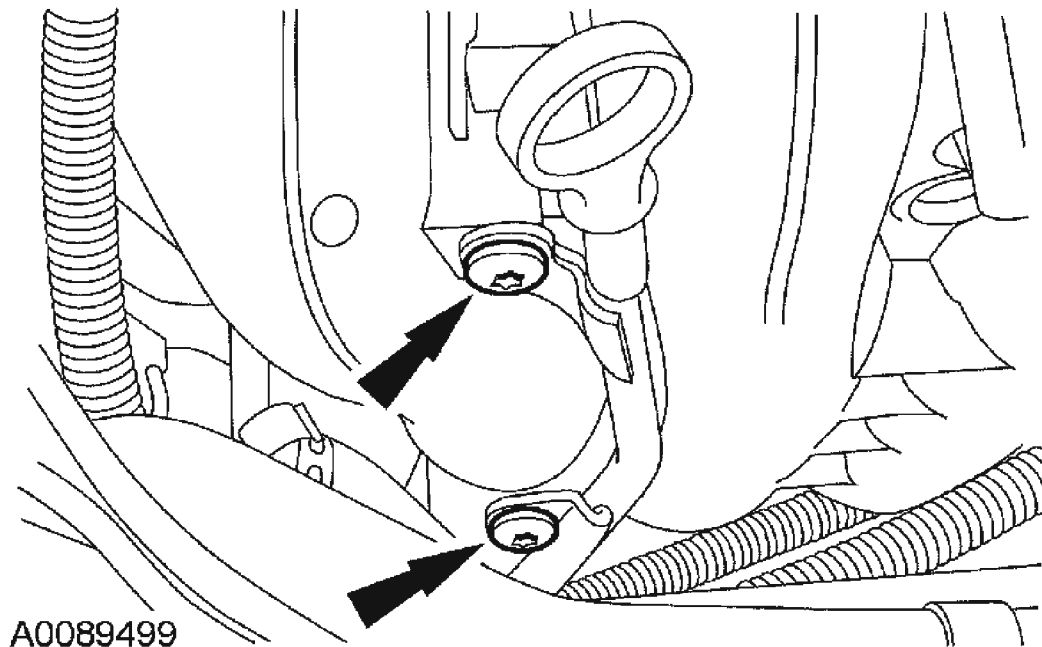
Removing Bolts, Oil Level Indicator And Tube
